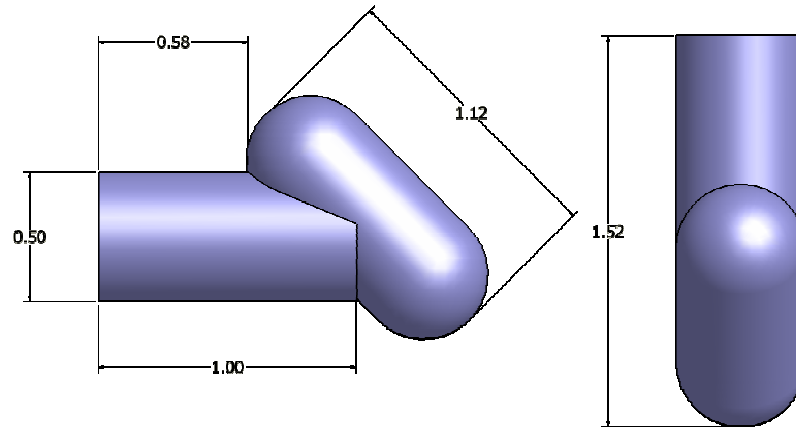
Drawing of angled electrodes used for surface flashover/erosion experiments.
